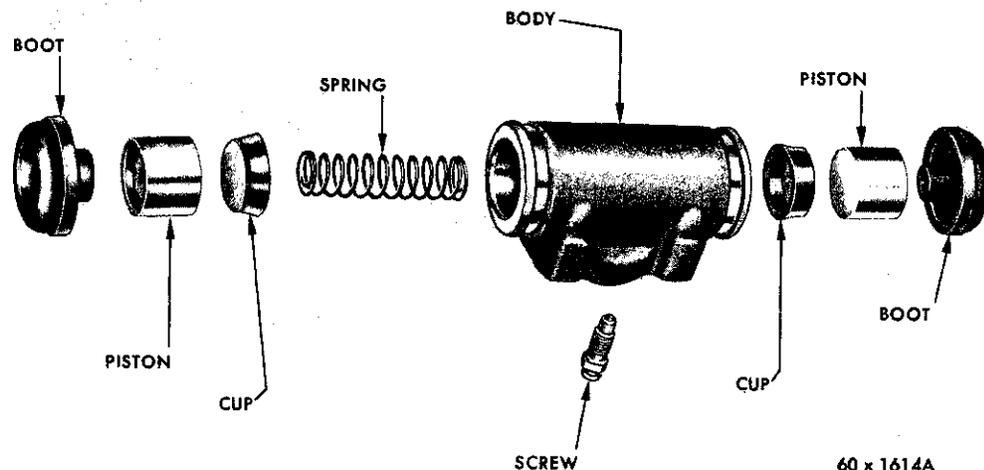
Wheel Cylinder Assembly (Disassembled)
